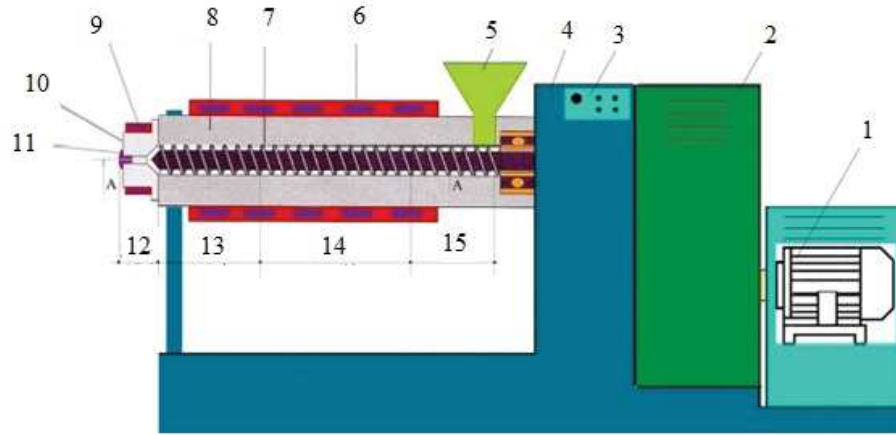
Extruder scheme: 1 - electric motor; 2- mechanical transmission; 3 - control panel; 4- frame; 5- supply hopper; 6- heating-cooling system for barrel; 7- screw; 8- barrel; 9- heating-cooling system for die; 10- die; 11- nozzle; 12- die section; 13- pressure section; 14- transition section; 15- feed section
